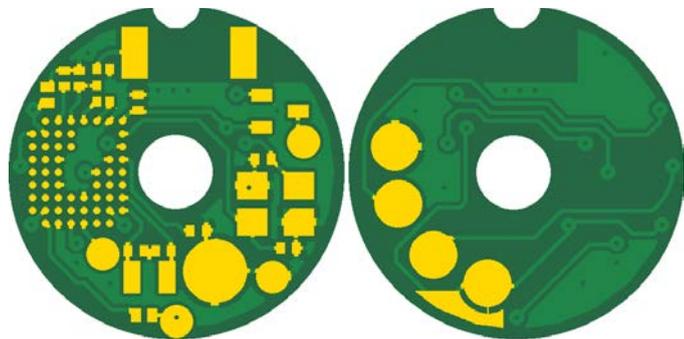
Printed circuit board design (top-bottom) of the final electronic module for the dental implant.
